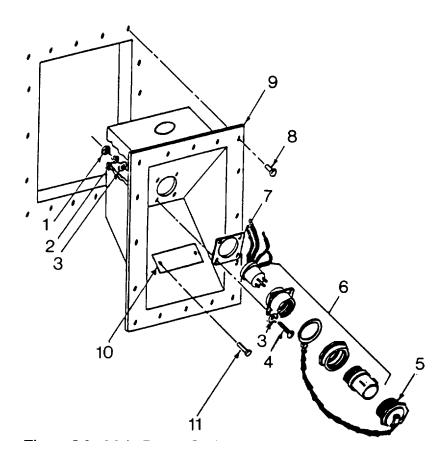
Main Power Cable Receptacle Assembly (Outside Shelter)
